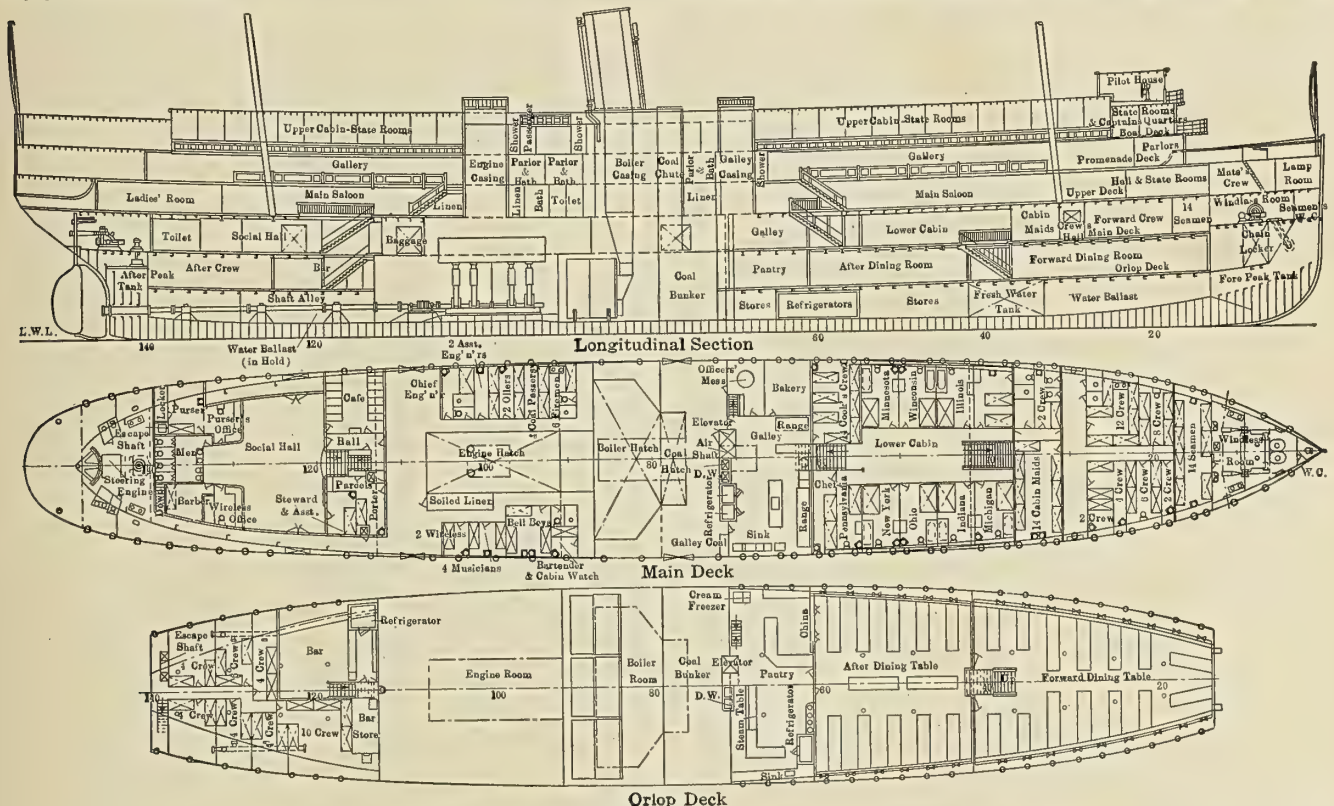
Inboard Profile of the *South American* and Plans of the Main and Orlop Decks
